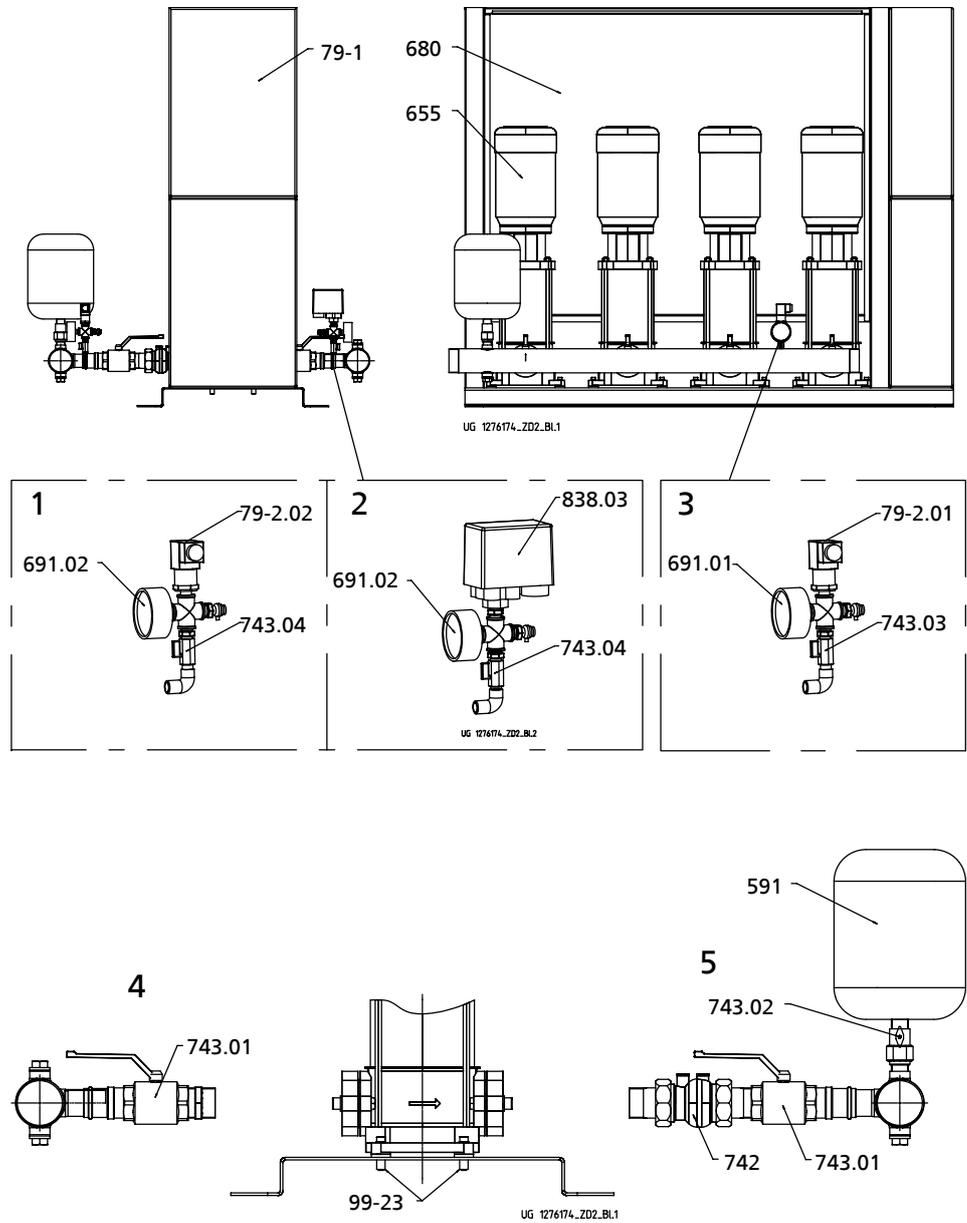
General assembly drawing of Hyamat K with Movitec 2, 4, 6, 10, 15
